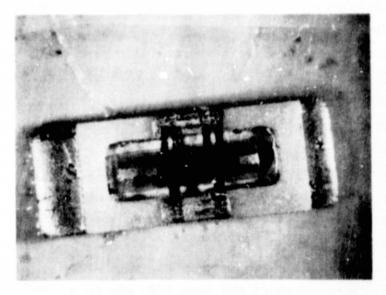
Photograph of 2 FET pellets flipchip mounted on a carrier.
